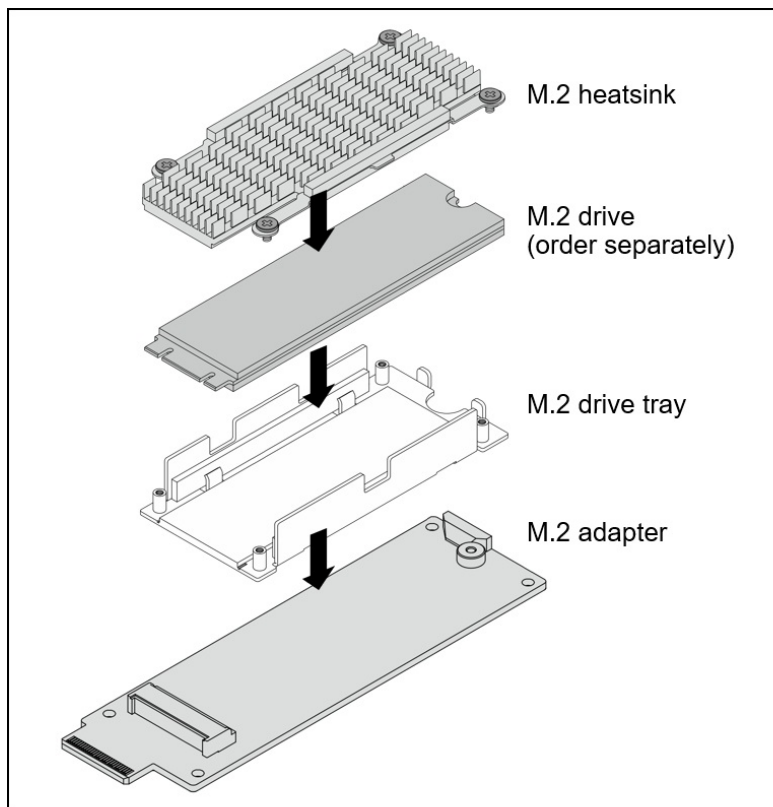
Components of the ThinkSystem V4 1U/2U Hot Swap M.2 SATA/NVMe Drive Assembly Kit
